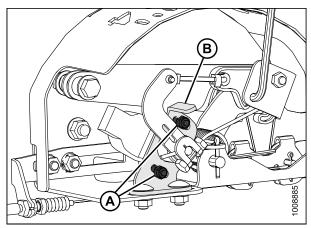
10 Volt AHHC Sensor Assembly for Use with Some New Holland Combines
